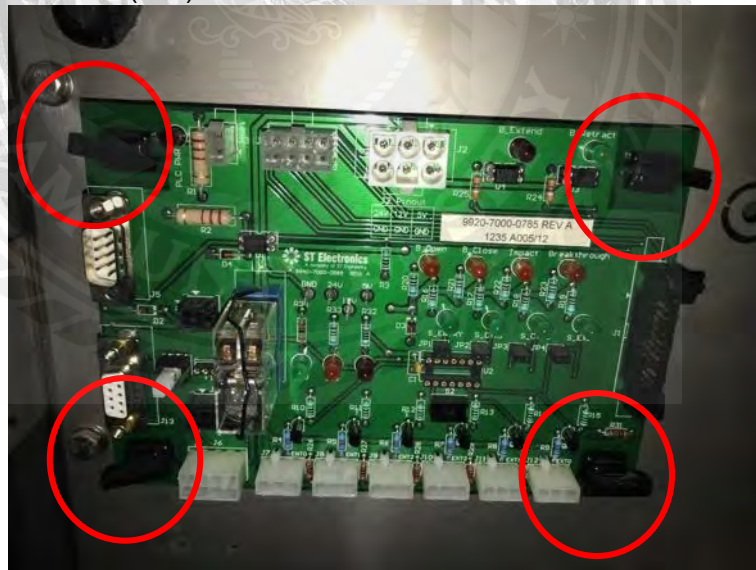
Barrier Interface Board and the Locations of the Nylatch
